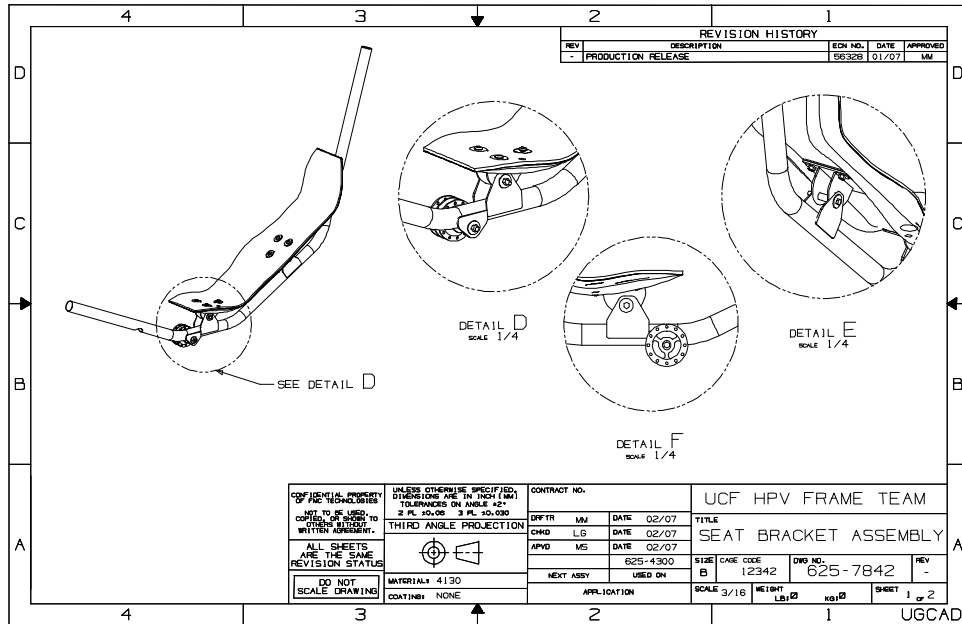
Detailed Seat and Idler Bracket Assembly Drawing.
